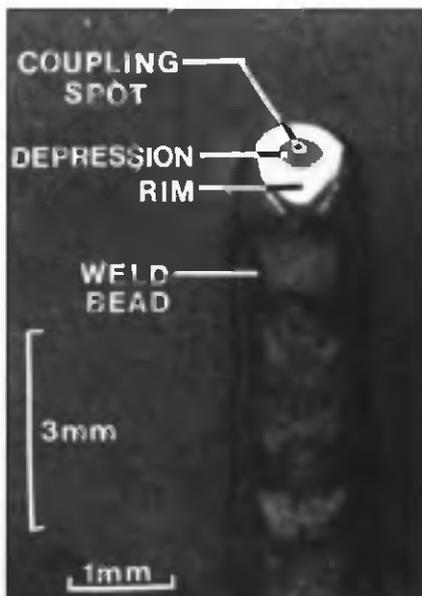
Inclined-camera image of a depressed pool from a 1.5-kW test weld (2.03 m/min) showing the coupling spot, the depression and the pool rim.
